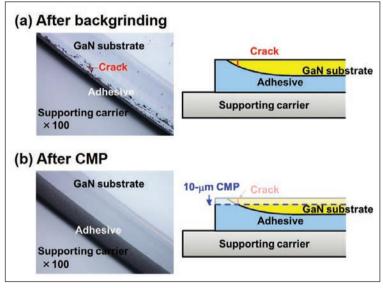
Photograph and schematic cross-section of wafer edge after backgrinding (a) and chemical-mechanical polishing (CMP) (b).
